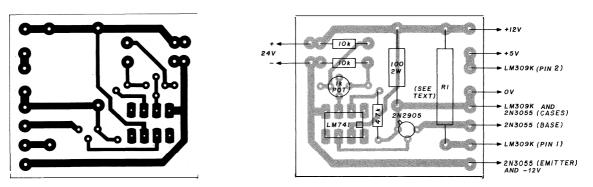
Full-size printed-circuit board layout and component placement diagram for the MSI/LSI voltage adapter.
